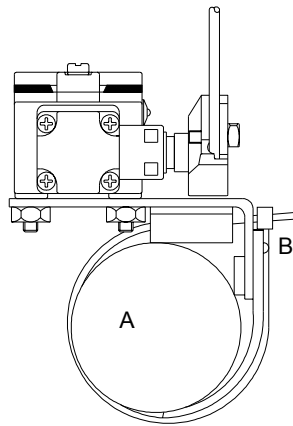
Lynx™ Mold-Closed Limit Switch front view
